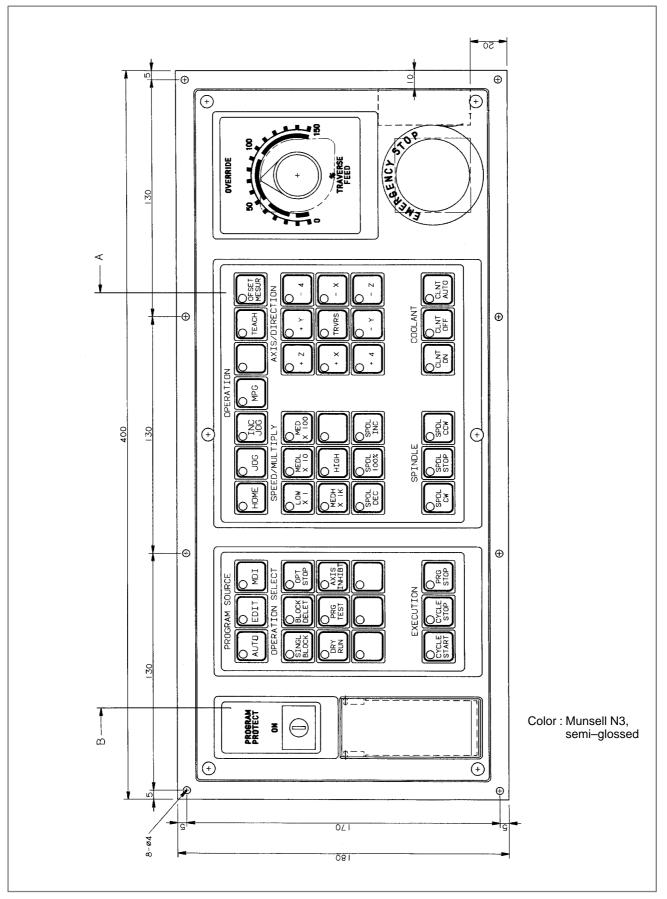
(b) Front view of machine operator's panel for small unit (M series)
